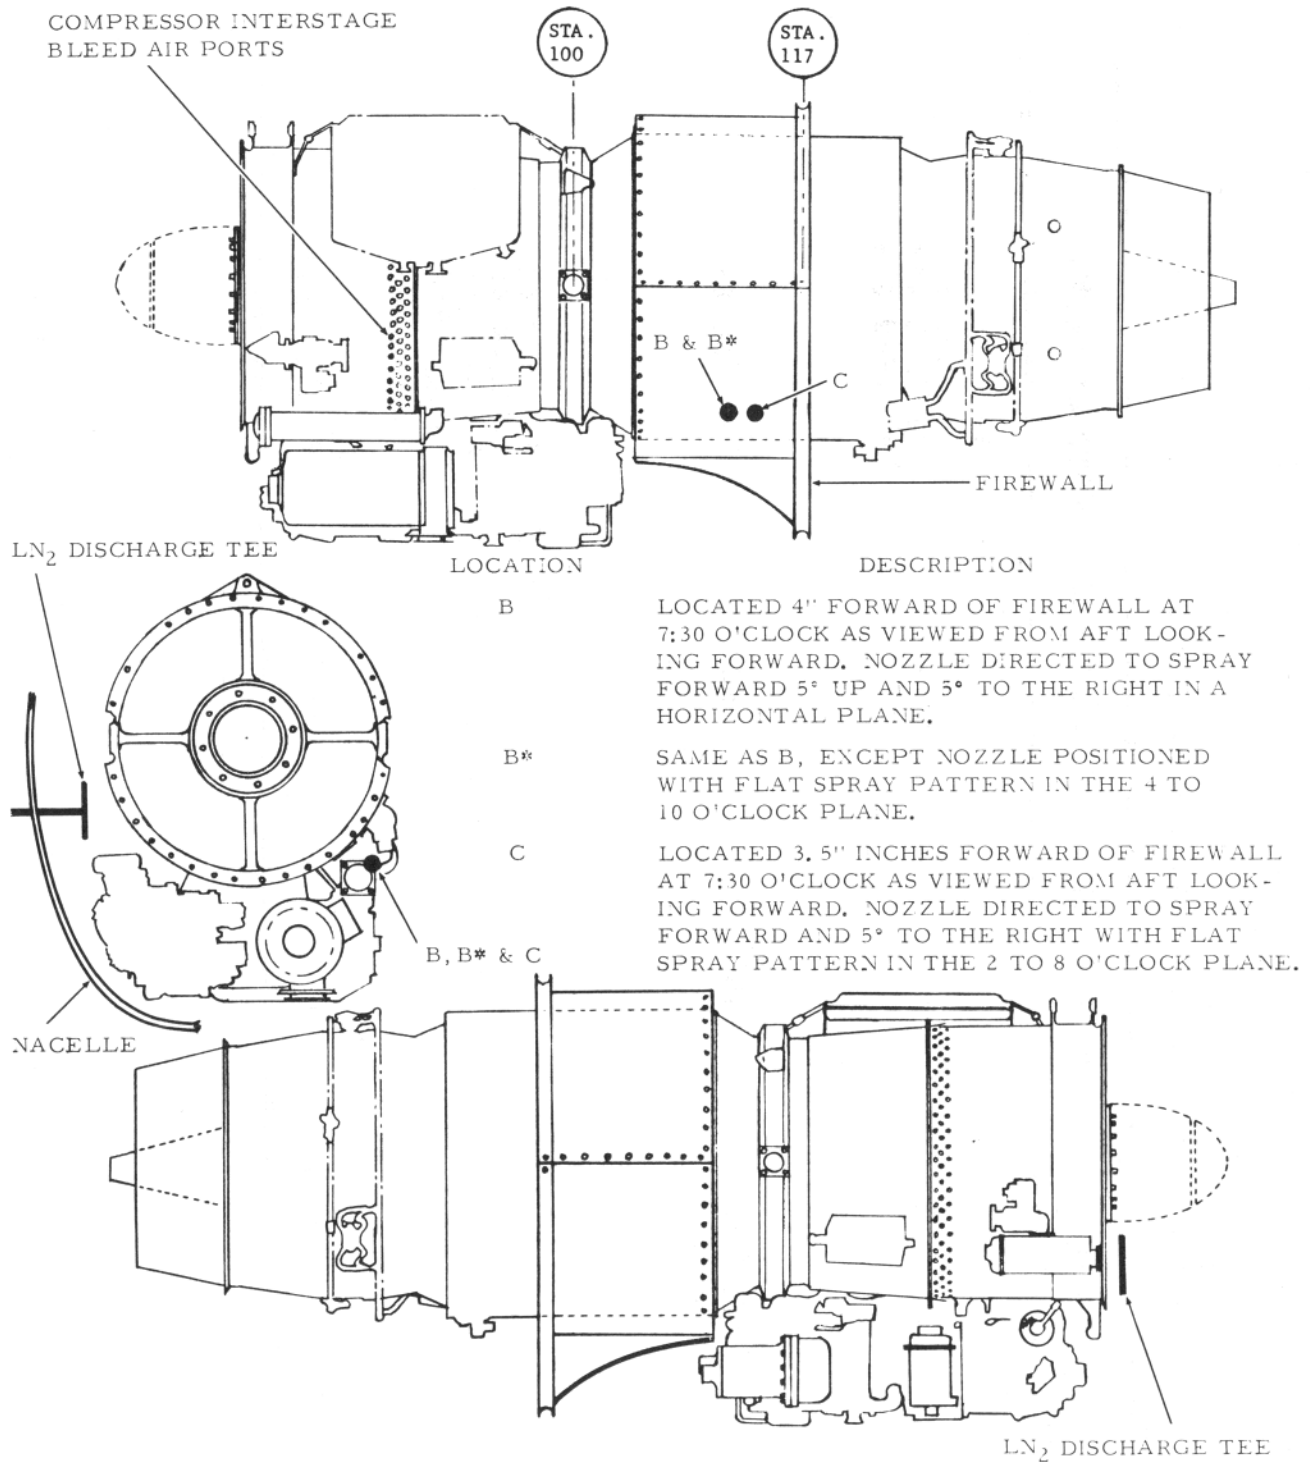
LOCATION OF FUEL-TO-FIRE NOZZLES AND LN₂ DISCHARGE NOZZLE IN TEST ENGINE INSTALLATION
